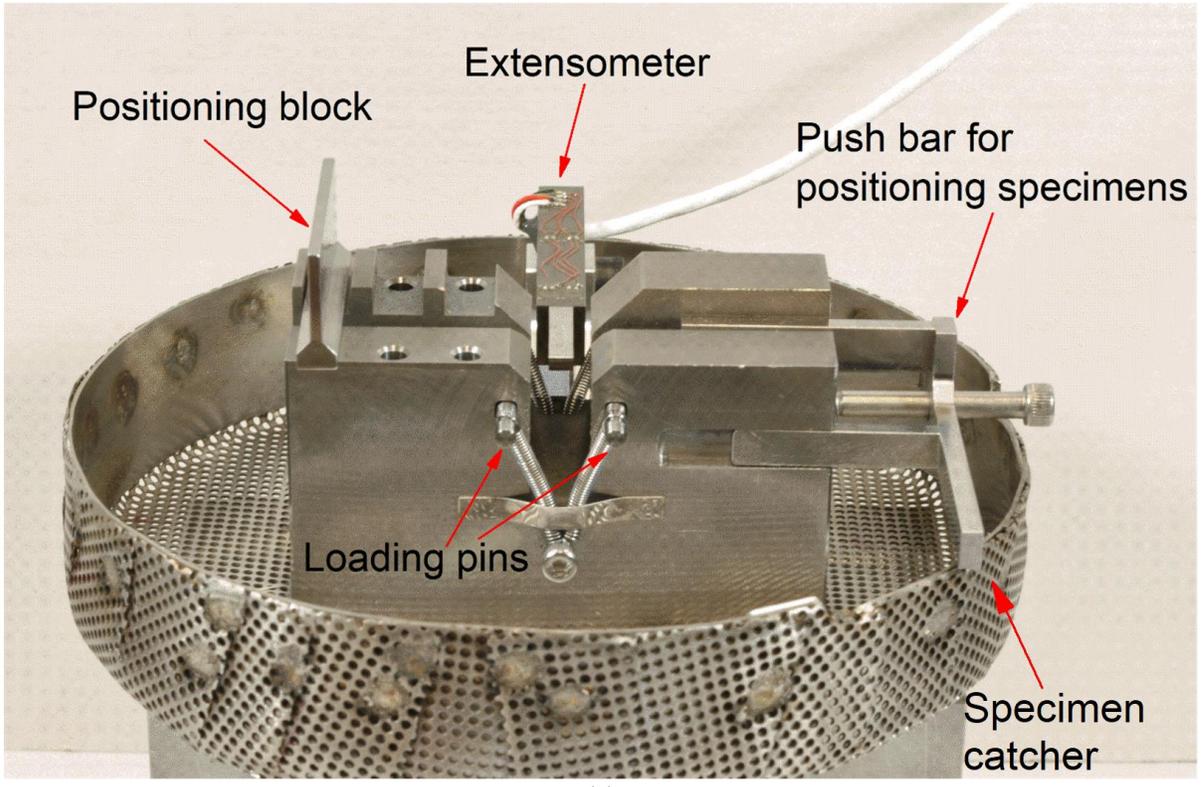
shows the M4CVN bend bar test fixture. The extensometer is used to measure the load line displacement of the specimen. The specimen catcher minimizes the chance of losing specimens during manipulator handling. The push bar can slide left and right and push the specimen against the positioning block such that the specimen notch is aligned at the correct test position as shown in Figure 3.3b. The top indenter shown in Figure 3.3c is used to load the specimen during testing. It has thermocouple wires spot welded to its front and back surface to measure test temperatures. Based on our recent testing experiences, temperature measurements from the thermocouple spot welded to the top indenter matched the temperature measurements from the thermocouple spot welded to a miniature multi-notch bend bar specimen for at least a temperature range of -160 to 80 °C. Due to the multi-notch design of M4CVN specimens, the tested notch has to cleave after a test so that the next notch can be positioned for testing. However, in case the specimen experiences ductile fracture and the tested notch does not cleave, the specimen breaking device shown in Figure 3.3d can be used to break the specimen at the tested notch location. The specimen breaking device employs the similar concept as the bend bar test fixture in Figure 3.3a where the positioning block and specimen place holder are used together to align the notch with the specimen break bar as shown in Figure 3.3e. Also, liquid nitrogen is fed into the breaking device to minimize the force and specimen deformation during the breaking process. Lastly, crack length measurements on the fracture
